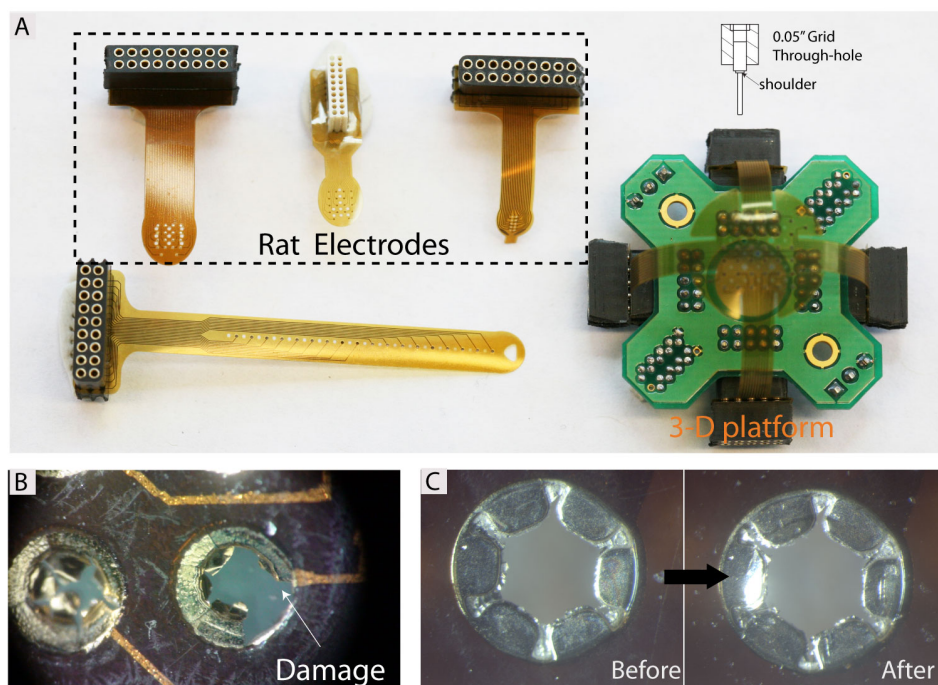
A. Different electrode designs using the Milmax connector. B. Damage on the contact ring due to the mechanical stress when clamping two Milmax pins together to form electrical connection. C. Modified contact pad with serrated annular ring designed to relieve mechanical stresses at the pin shoulder and reduce the damage.
